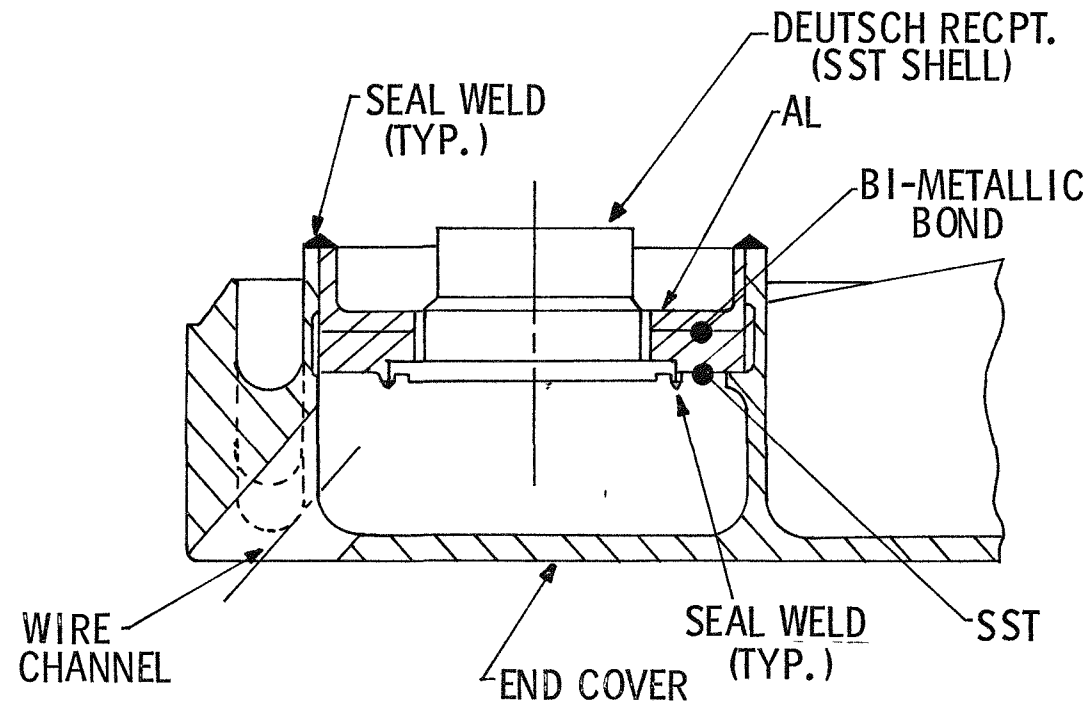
Electrical Receptacle Assembly Application of Bimetal Weld Transition Joint to the SIG/Galileo Design
